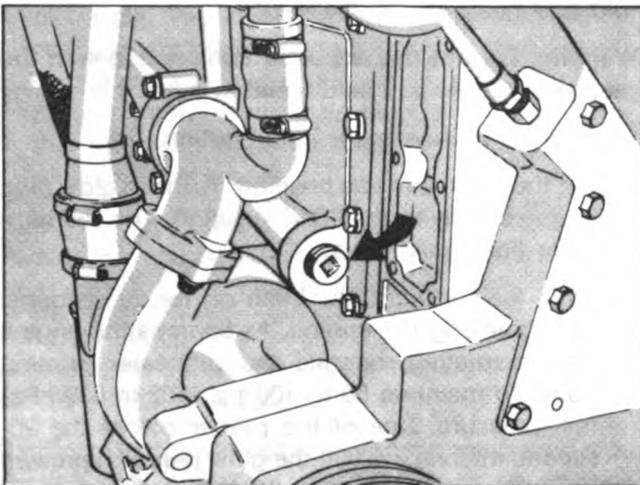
, (OM1004L). Lubricating system priming point—KT/KTA C.I.D. Engine
